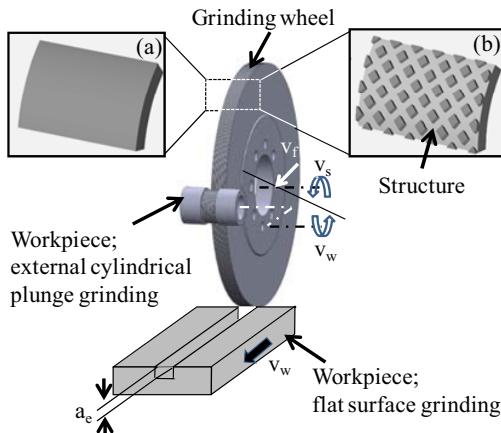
Schematic views: (a) normal grinding wheel with full contact layer, (b) structured grinding wheel with reduced contact layer
